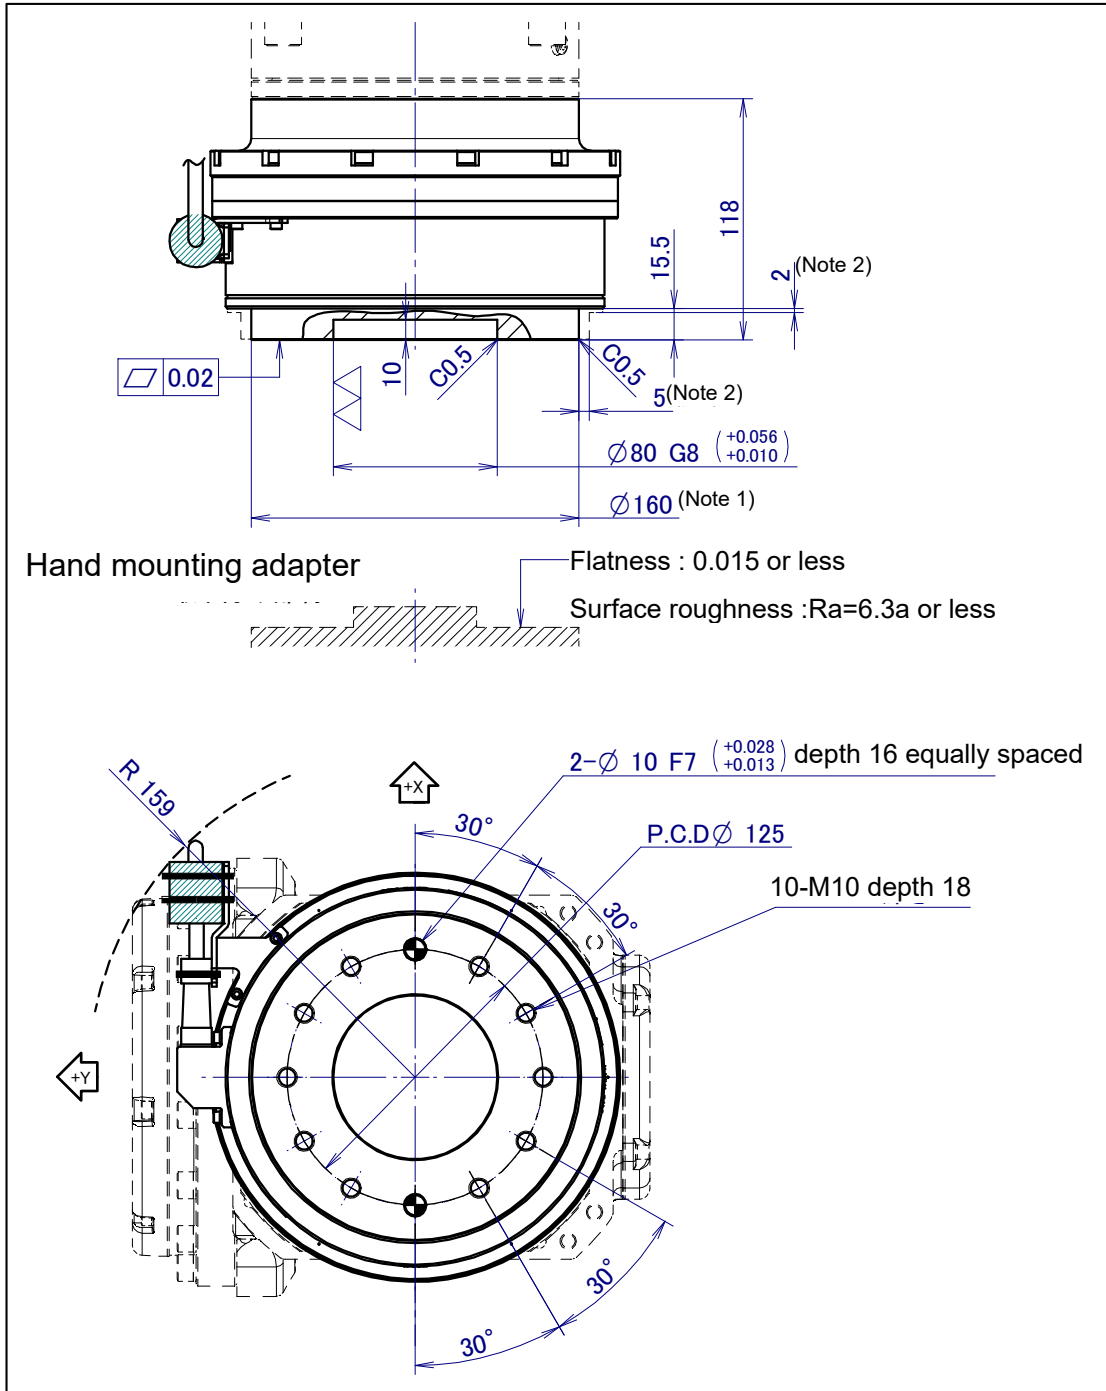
(d) Wrist section end effector mounting surface (FS-250iA standard adapter)
